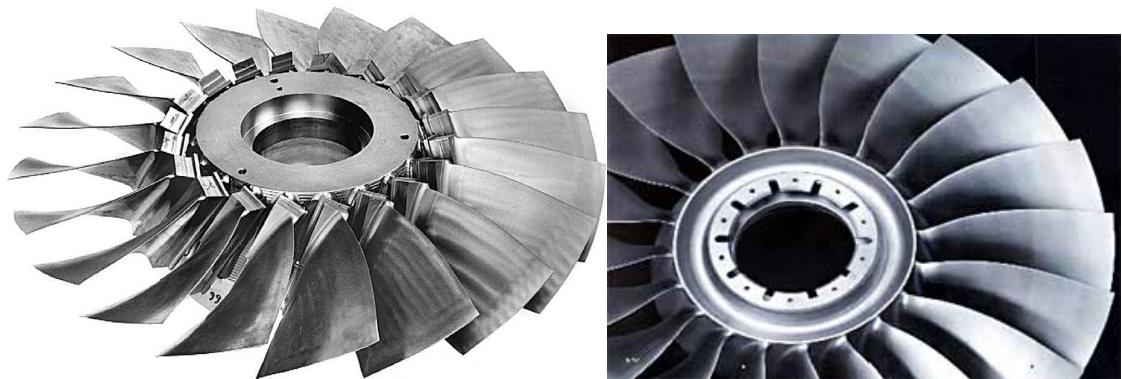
A linear friction welded blisk assembly produced by MTU München for Eurofighter: left (as welded), right (as machined) (6; 7, p. 387)
